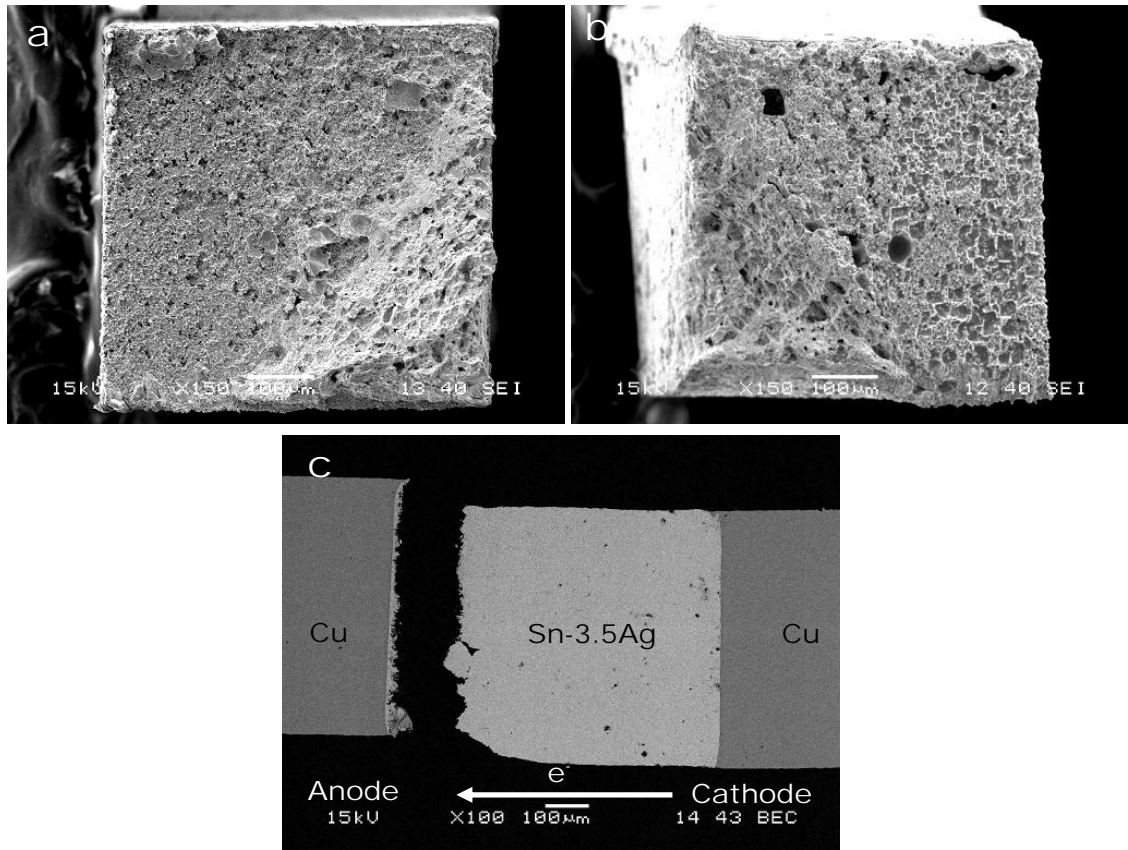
SEM images showing fracture in the electroless Ni-P/Sn-3.5Ag solder joint aged at 160 °C for 100 h with 3×10^3 A/cm² current density: (a) Anode side top view, (b) cathode side top view, and (c) cross-sectional view. Brittle failure occurred at the Ni₃Sn₄/Sn-3.5Ag interface.
